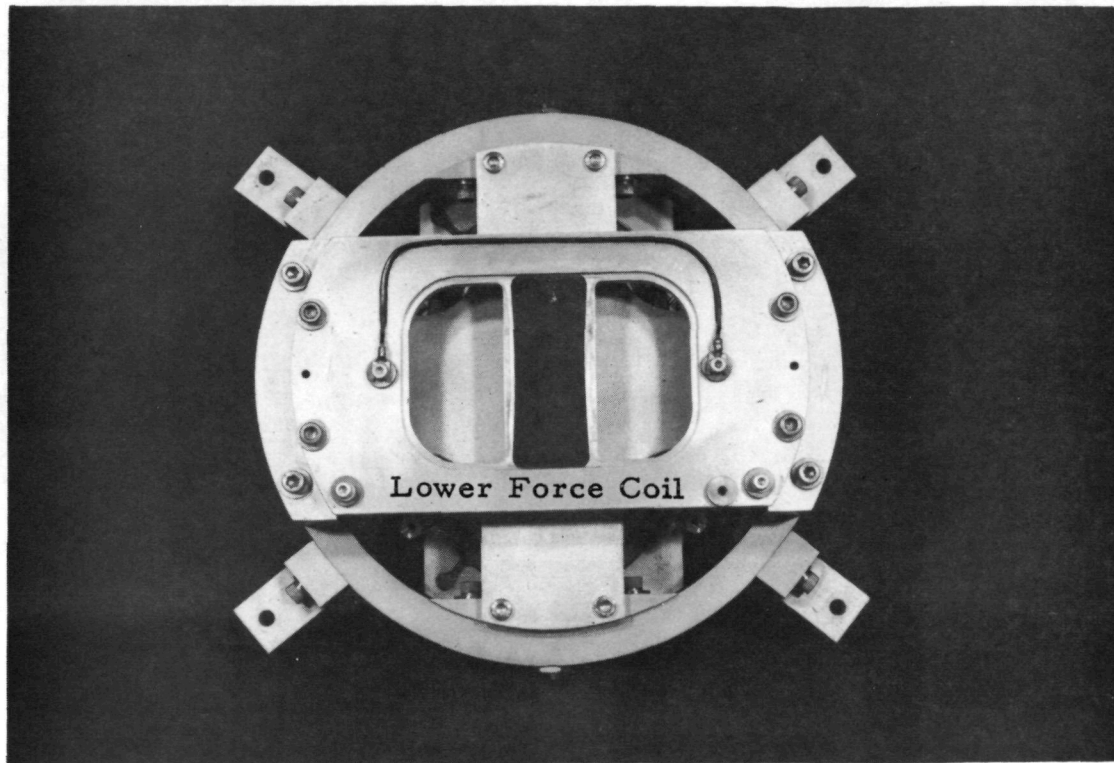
Damper Support Assembly With Force Coils Attached (bottom view)
